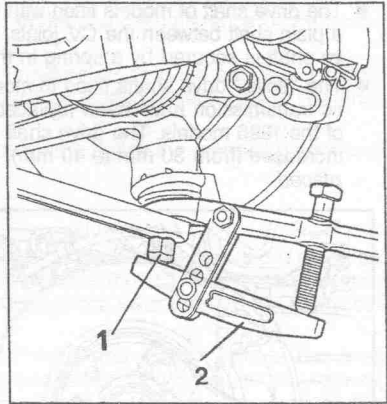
Removal of the lower suspension ball joint (1). An ordinary ball joint puller can be used in place of the special puller (2) shown.
